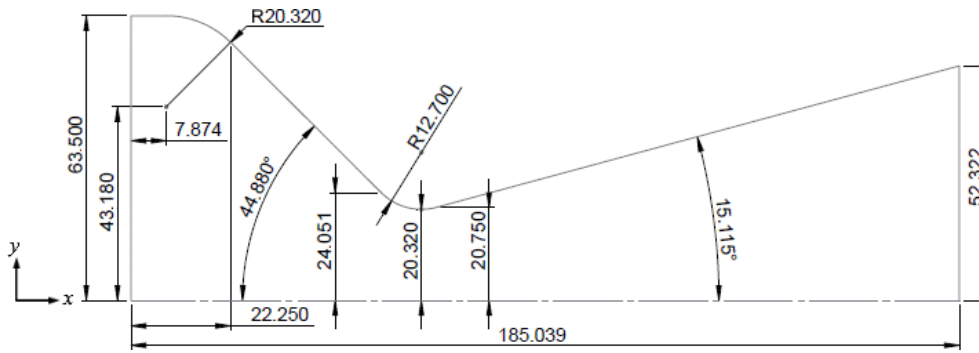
BGM45-15 nozzle profile with dimensions in millimeters.
